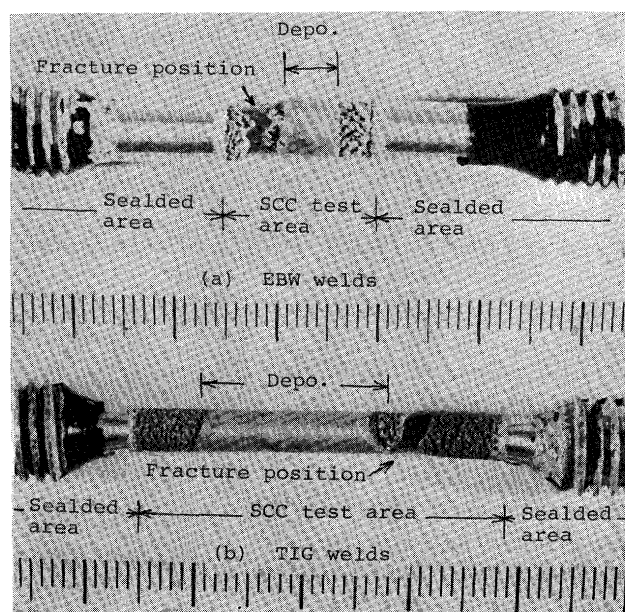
Fracture appearance of SCC in EBW welds and TIG welds.
